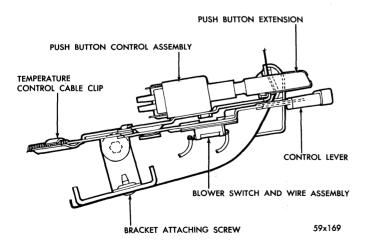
Blower Switch and Push Button Assembly (Windsor) (Schematic)
